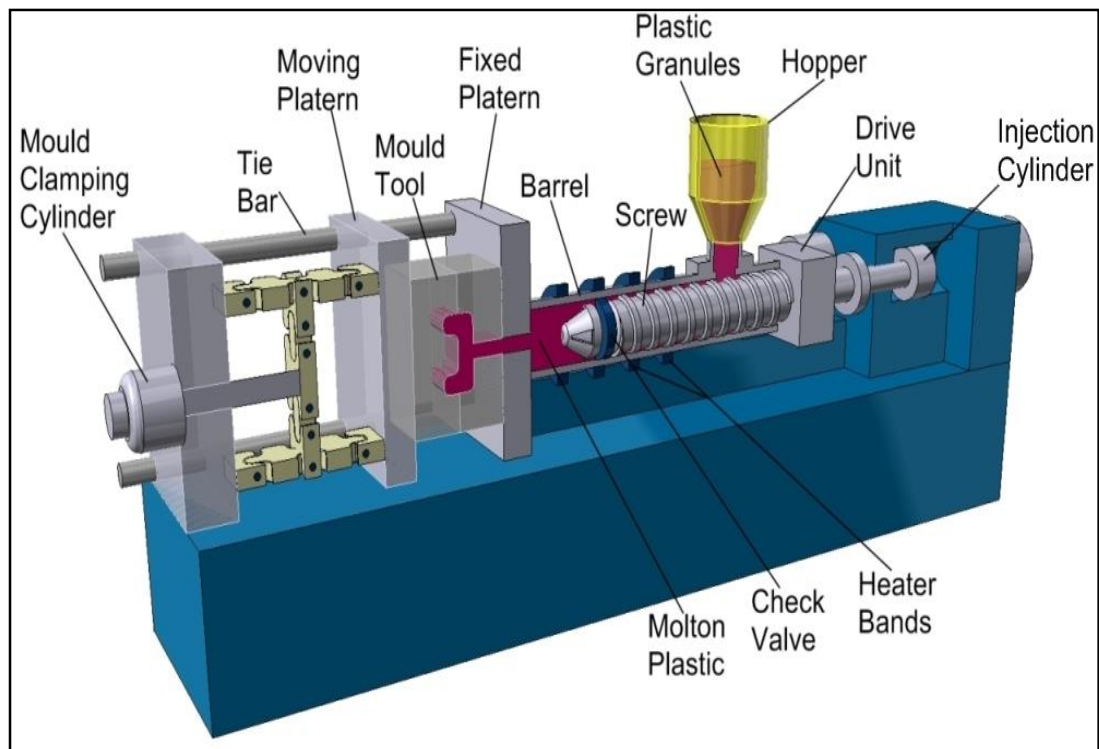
Schematic of an injection moulding machine (adapted from Rutland plastics)
